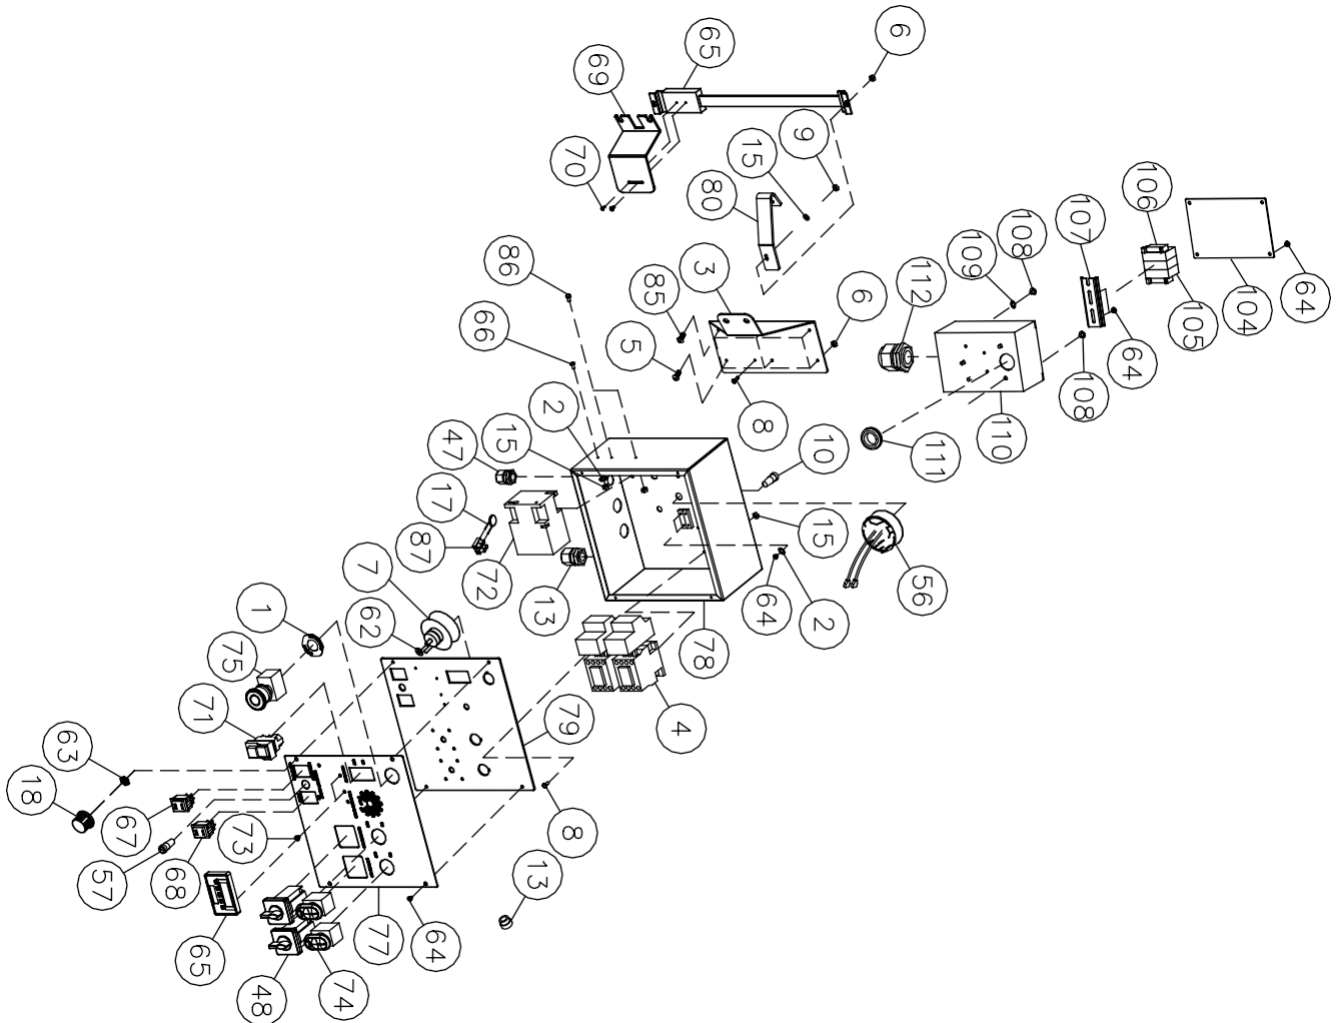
Control Panel Assembly (Included with Conveyor parts list)
